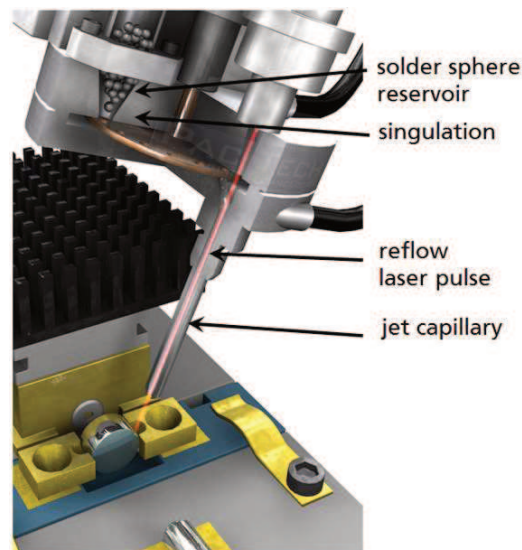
Schematic drawing of the solderjet bond head able to solder droplets with 6 degrees of freedom (DOF).
